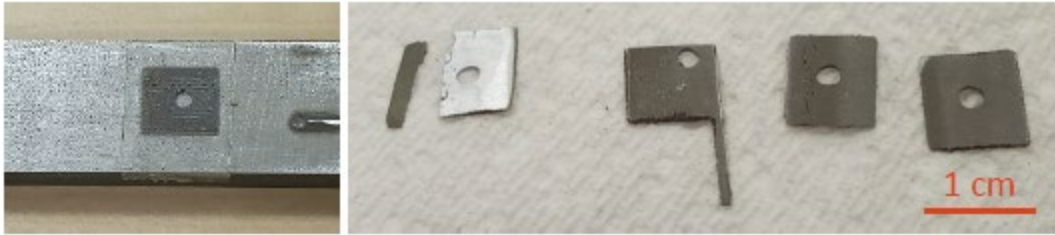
AM sample for corrosion test mounted for polishing after cut on wire EDM (left). Set of AM samples during polishing process; one sample fractured during the process (right).
